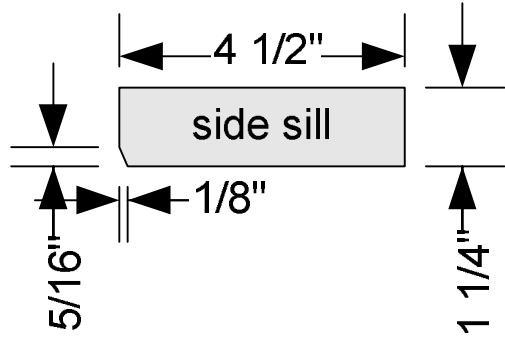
Floor Sill Assembly - Floor Cross Sills
